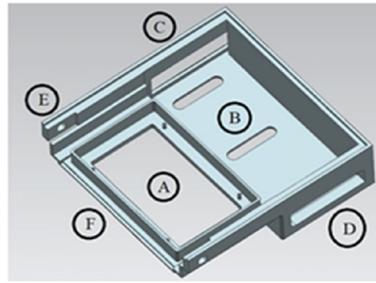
Lower part design of prototype. A This is a space for placing LED light. B A space to store almost all the components and batteries. There are three long shape gaps which face downward are used to dissipate the heat. C An empty space to install a gate. D An empty space to let the antenna of Lora/GPS shield and LED sensor explore outside. E This screw hole is for screw and holds the upper part together. F A ladder shape design is used to prevent the upper part back fall and also become more stable when upper part and lower part is combining together
